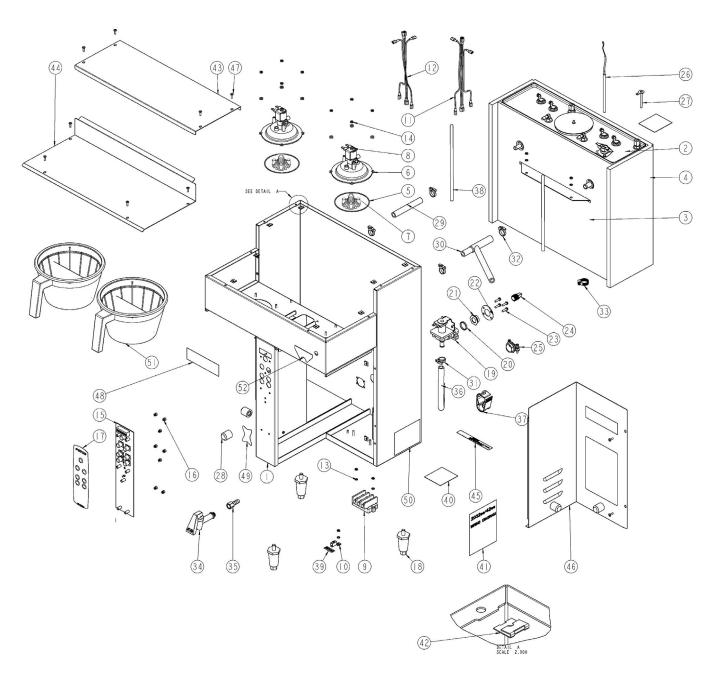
CBS-2031ee Tank Assembly, Part # 104094
